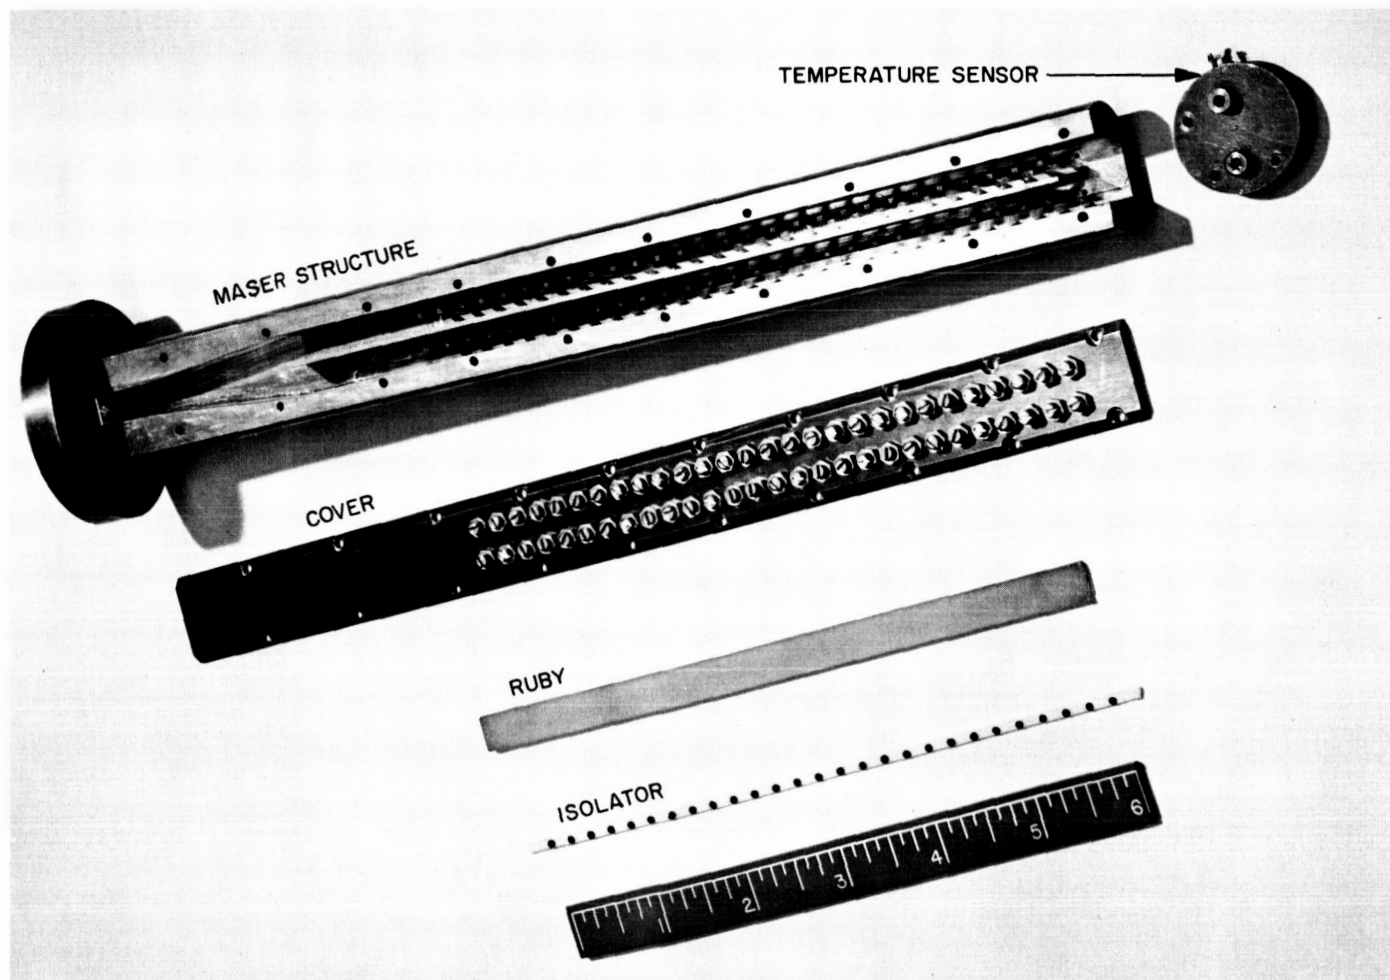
One-piece copper maser comb structure fabricated with conventional machining techniques
